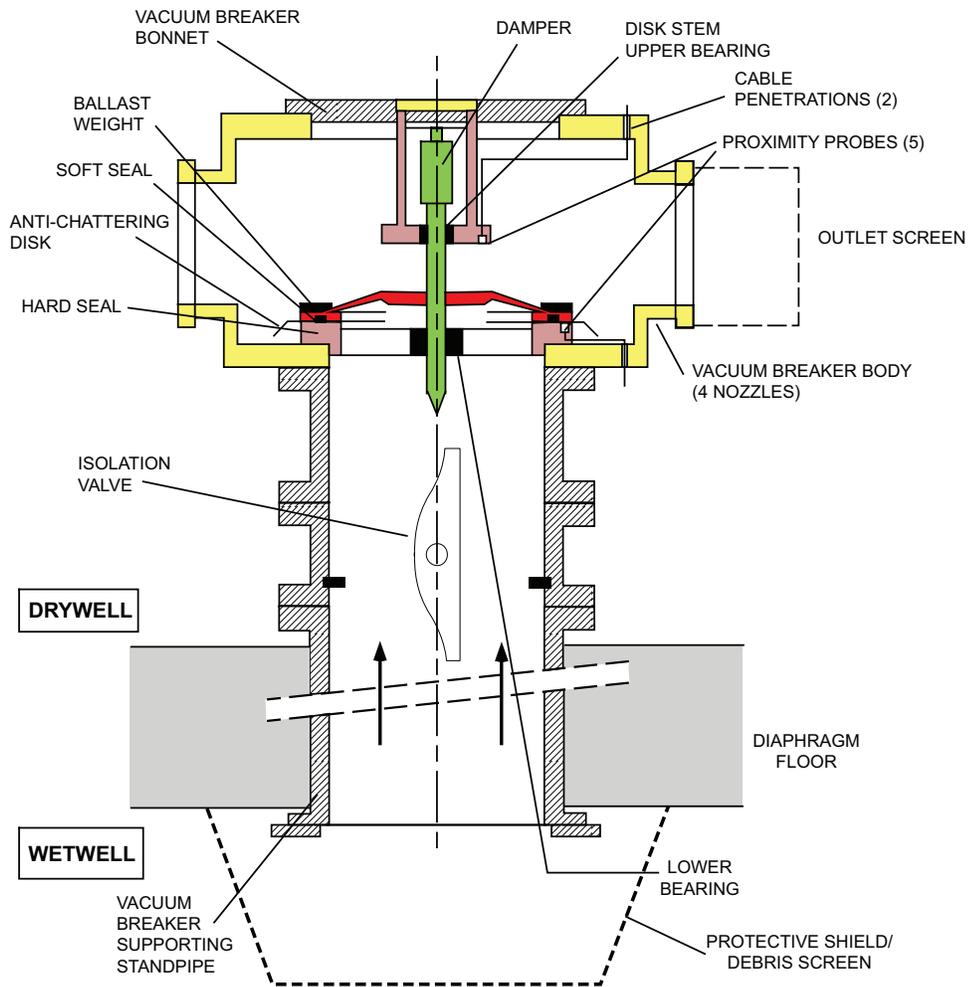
ESBWR Wetwell-to-Drywell Vacuum Breaker with Backup Closure Valve
